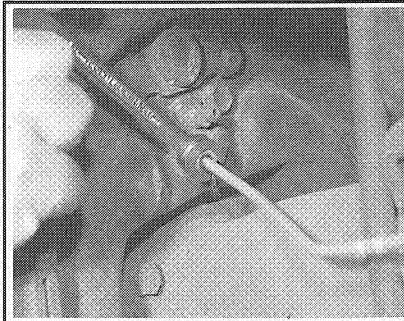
loosen the brake line fitting on the wheel cylinder
